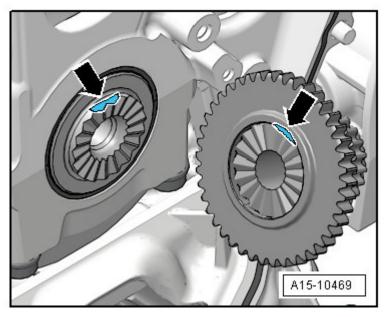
Identifying Chain Sprocket Crankshaft - Installation Position
